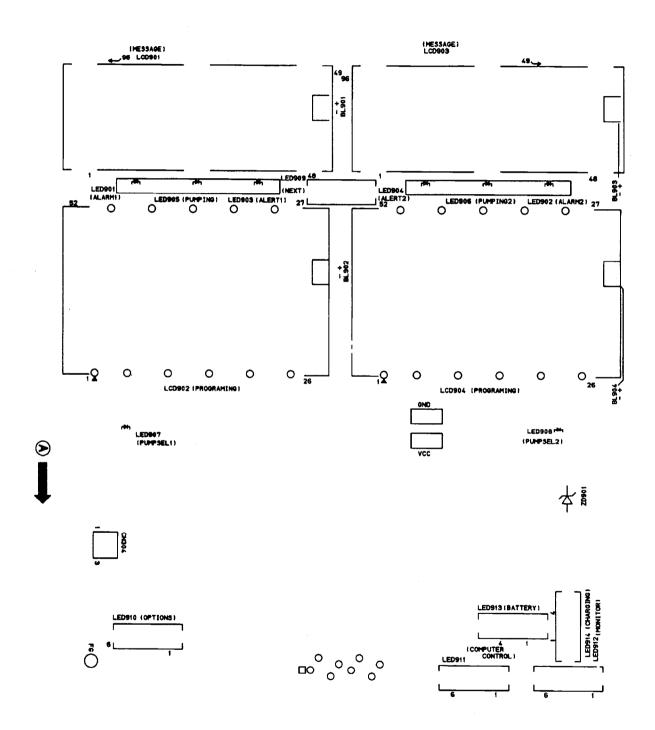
(Sheet 1 of 2). Display PCB-Component Side
